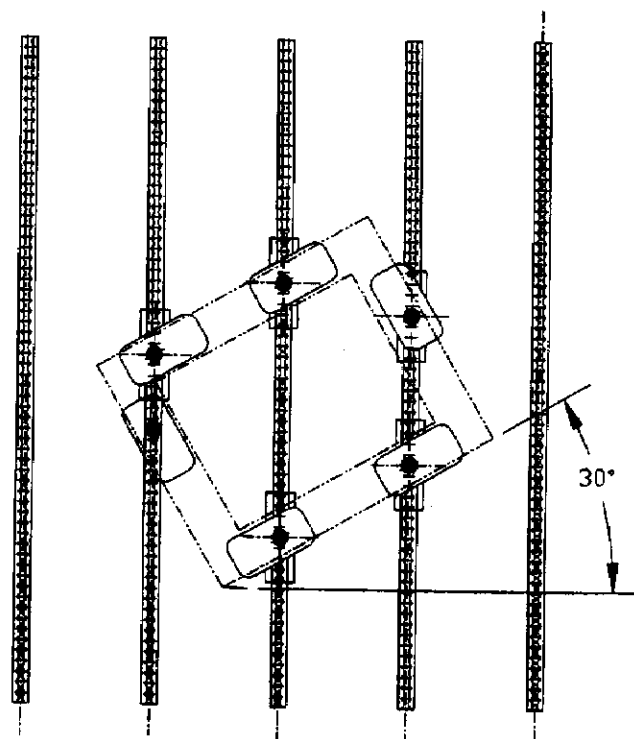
Equipment Located 30 Degrees To Foundation Track.
